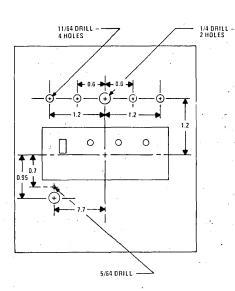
Drilling Guide for the Case Top if the MRC-1-10 Rotary Function Switch is Used. (Dimensions in inches.)
